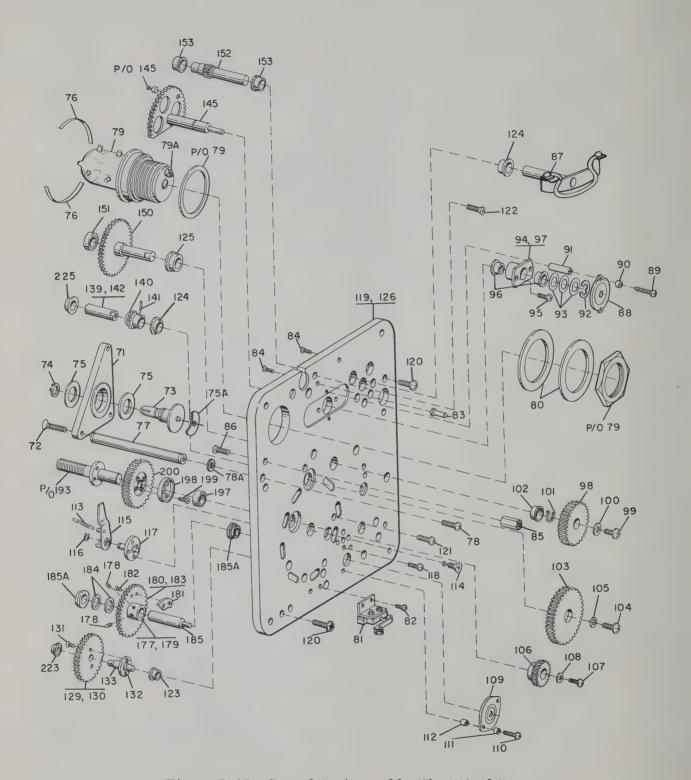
Gearplate Assembly (Sheet 2 of 2).
